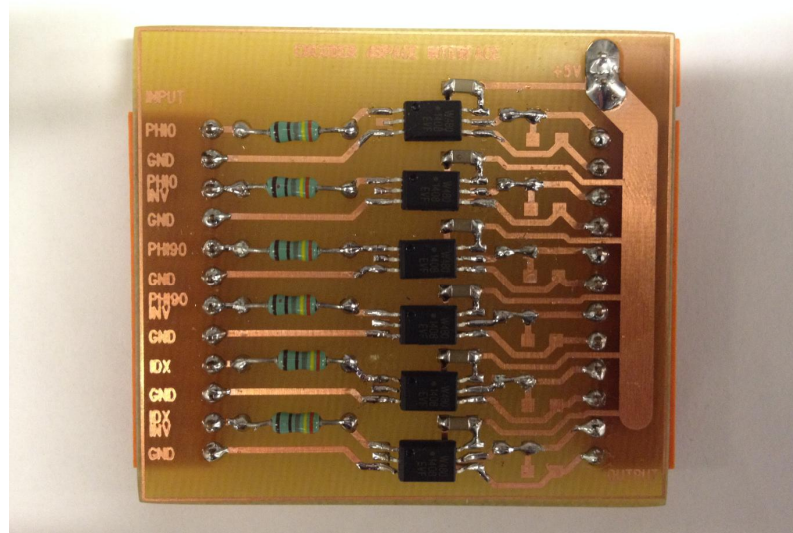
Soldered and finished incremental encoder dSPACE interface PCB.
